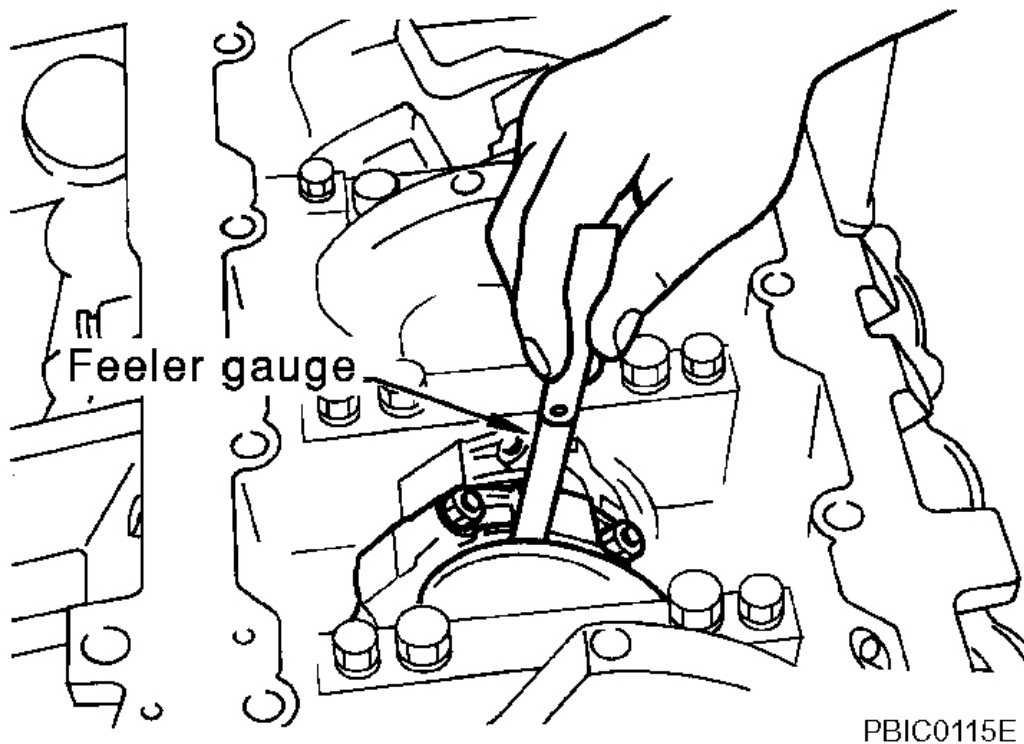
Measuring Side Clearance Between Connecting Rod And Crankshaft Arm With Feeler Gauge
